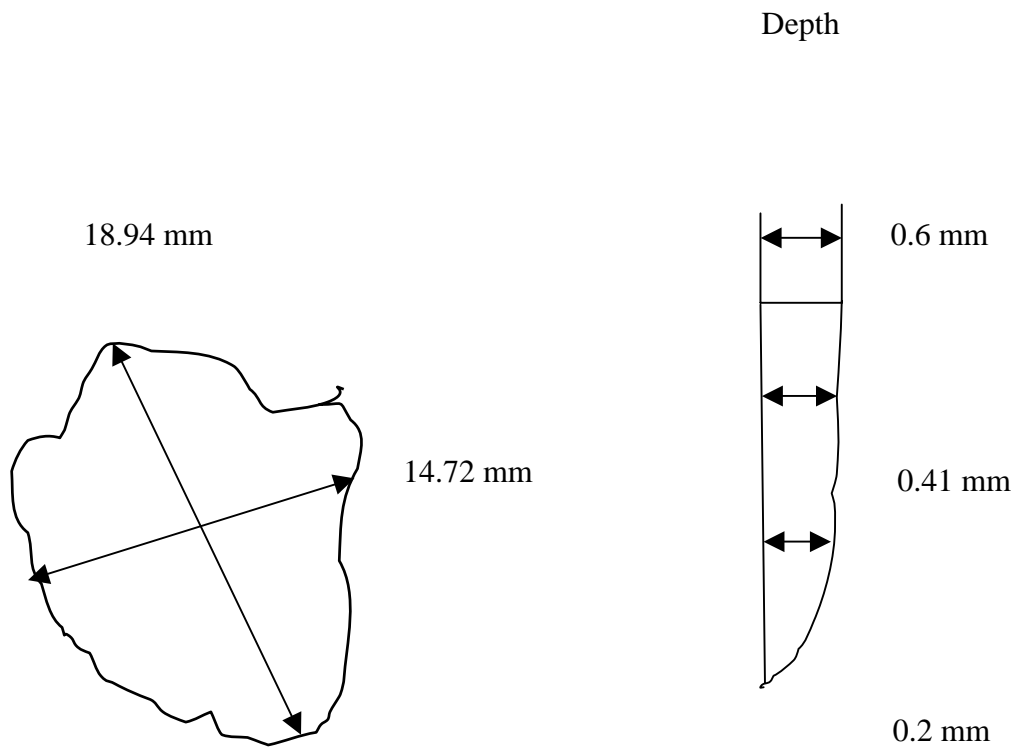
Sketch of #4 corrosion pit dimensional measurement.
